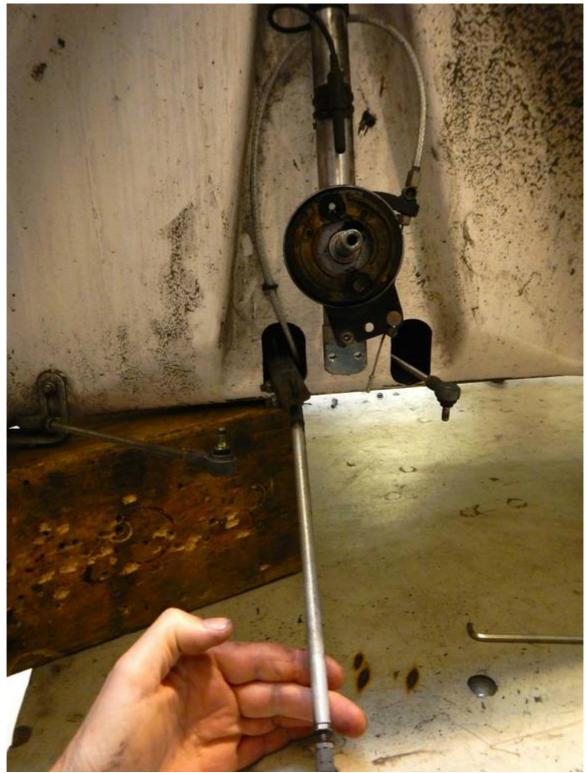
Take out the anchor plate by pulling the rod sideways. A lamp makes it easier to negotiate it out.
